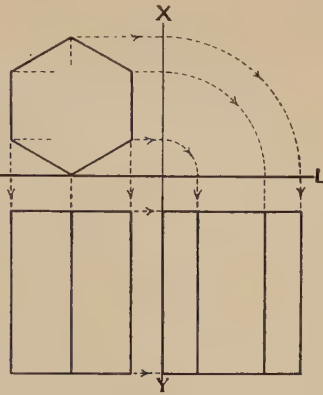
Hexagonal prism two faces perpendicular to V .
